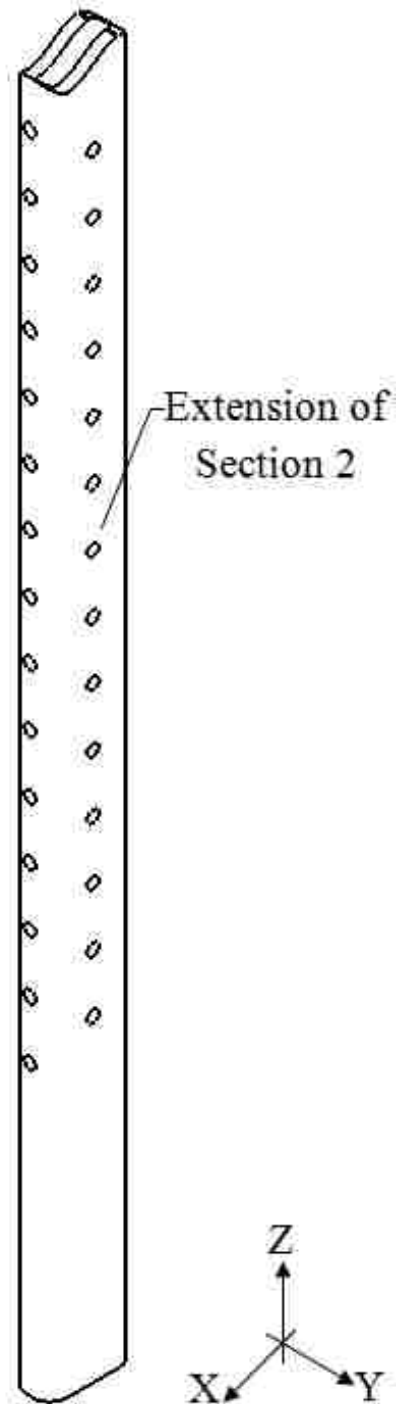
Isometric View. Extension of Section 2. It presents the Lower extension of the Rectangular Flexi-Drain. Section 2 is shown in Figure 6b.
